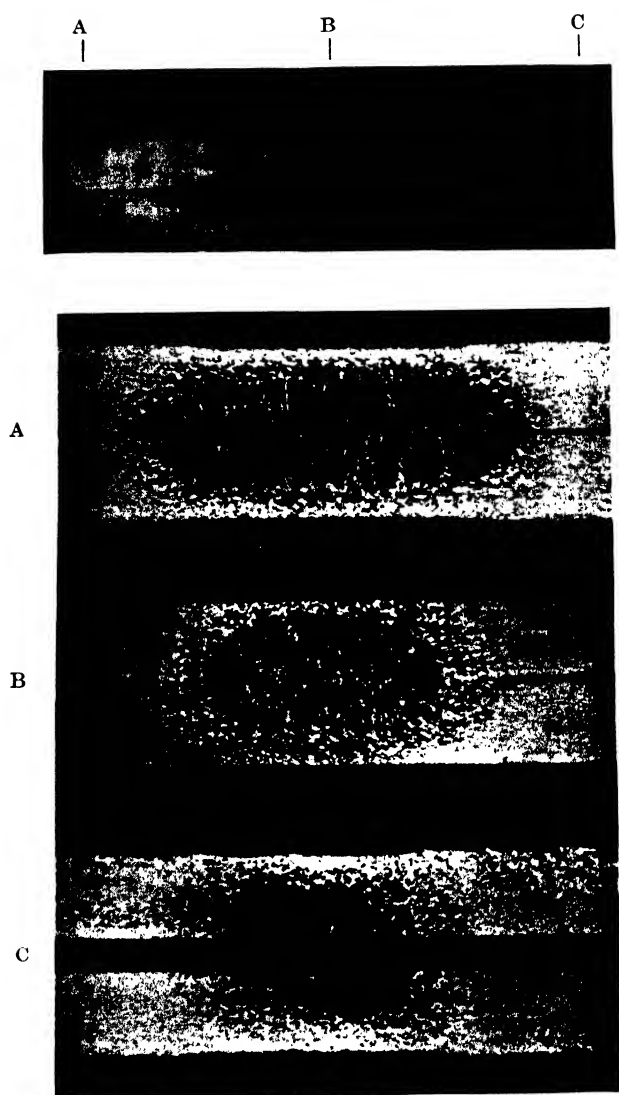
Sections of spot welds made under constant machine-setting on specimens cut from the indicated positions on the oxide colour band on close-annealed mild steel sheet. $\times 10$.
